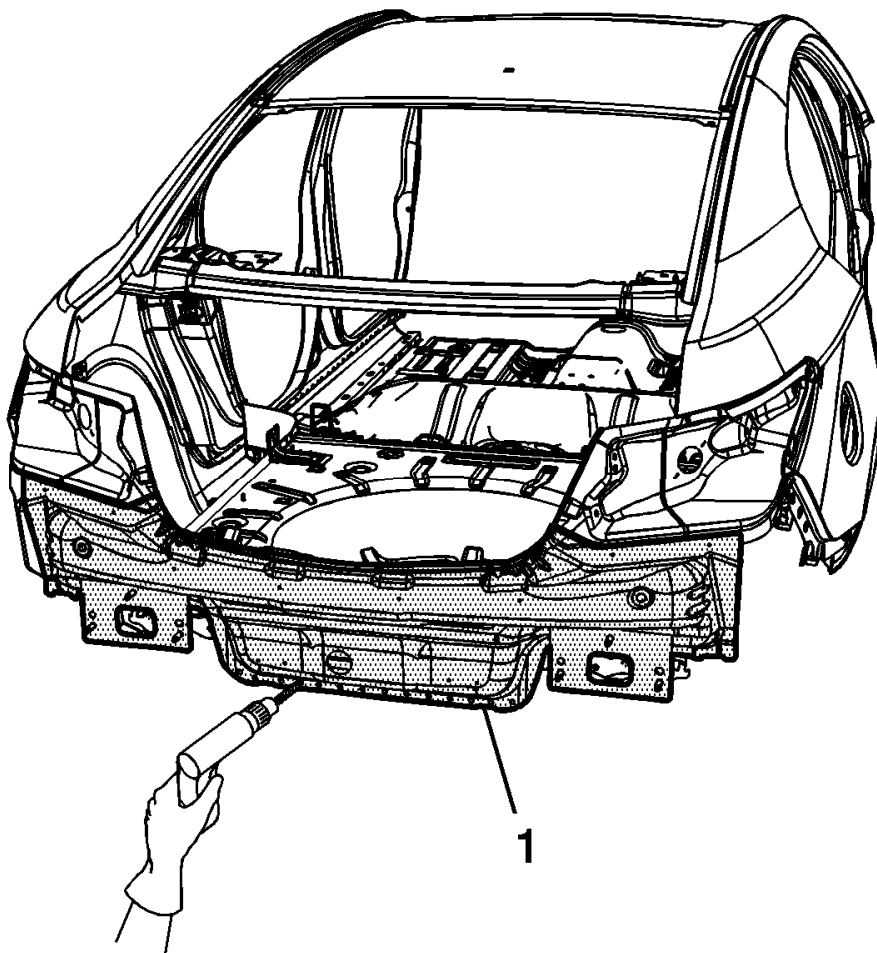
Drilling Out Body Rear End Panel Factory Welds
